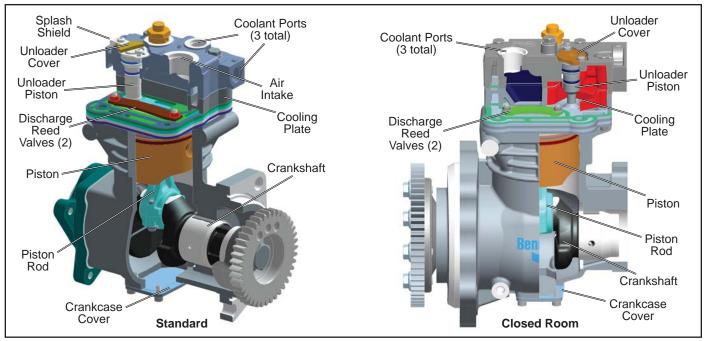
BENDIX® BA-921® COMPRESSOR (CUT-AWAY) (STANDARD AND CLOSED ROOM)
